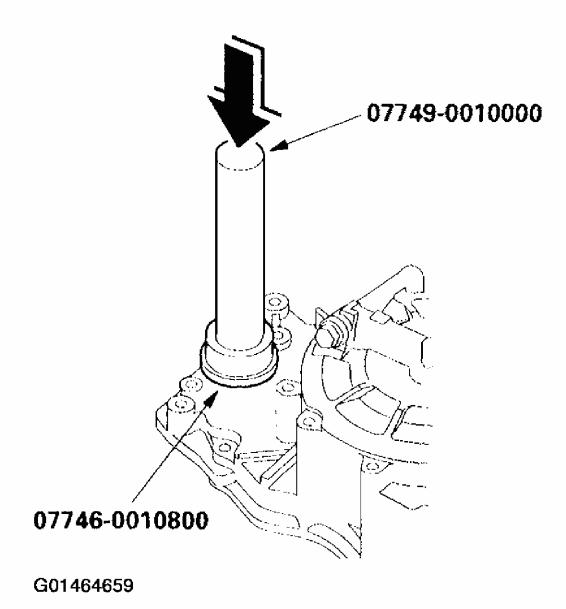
Installing The Oil Seal Flush To The End Cover Courtesy of AMERICAN HONDA MOTOR CO., INC.
